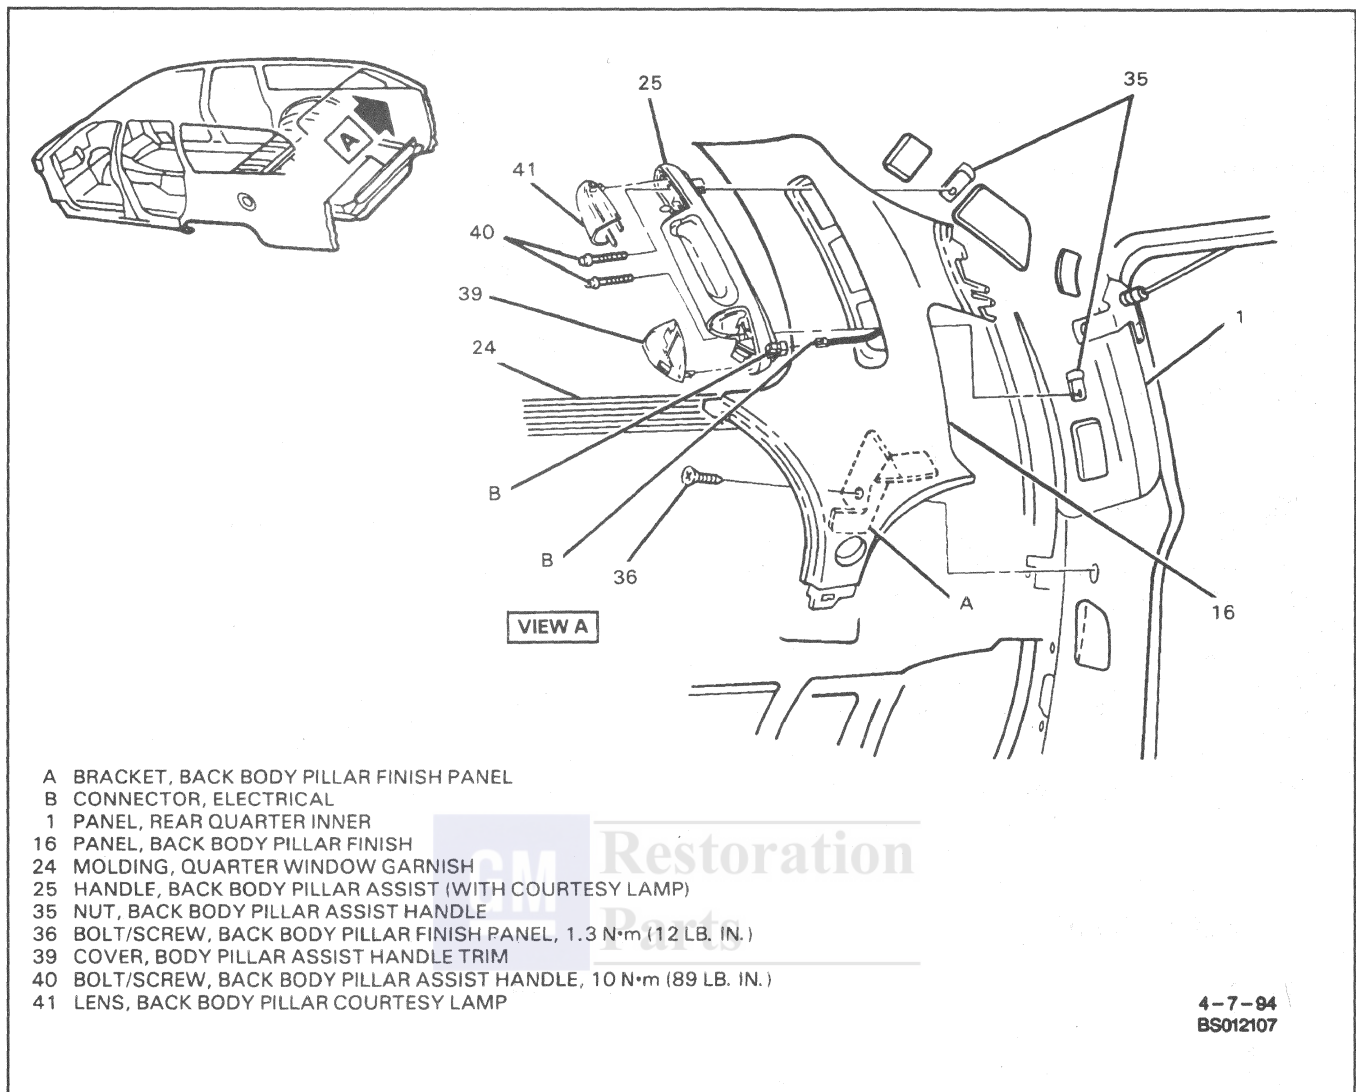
Back Body Pillar Finish Panel and Back Body Pillar Assist (with Courtesy Lamp) Handle -(Wagon)
